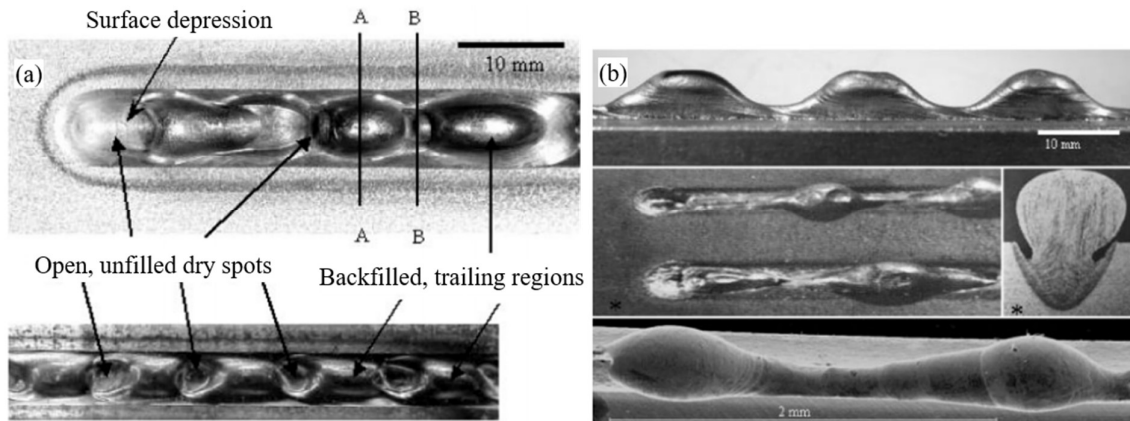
Weld bead humping: (a) gouging region morphology and (b) beaded cylinder morphology, as reported in Ref. [94]
